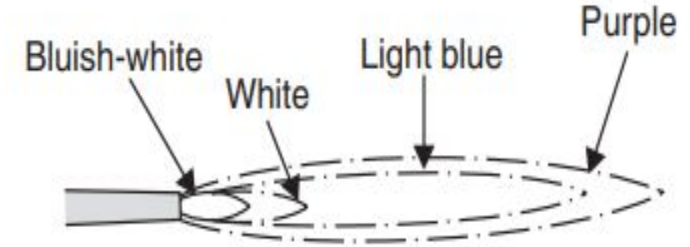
Carburising flame (3150°C) (*Excess acetylene*).
